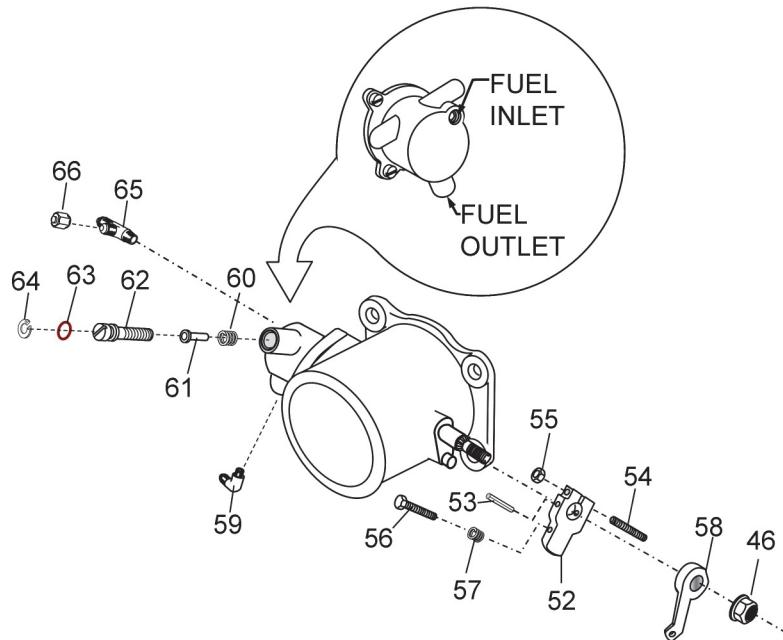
IO-550-G, N, P & R Throttle and Metering Assembly G N P R
